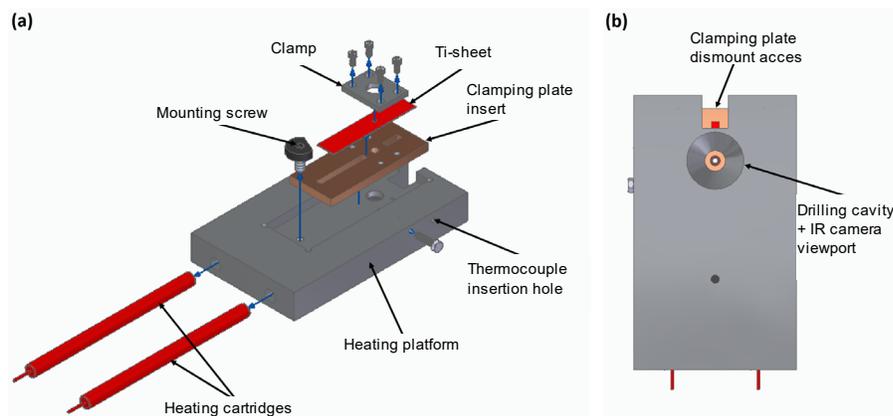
CAD drawing of the heating platform: (a) Exploded view, (b) Bottom view.
